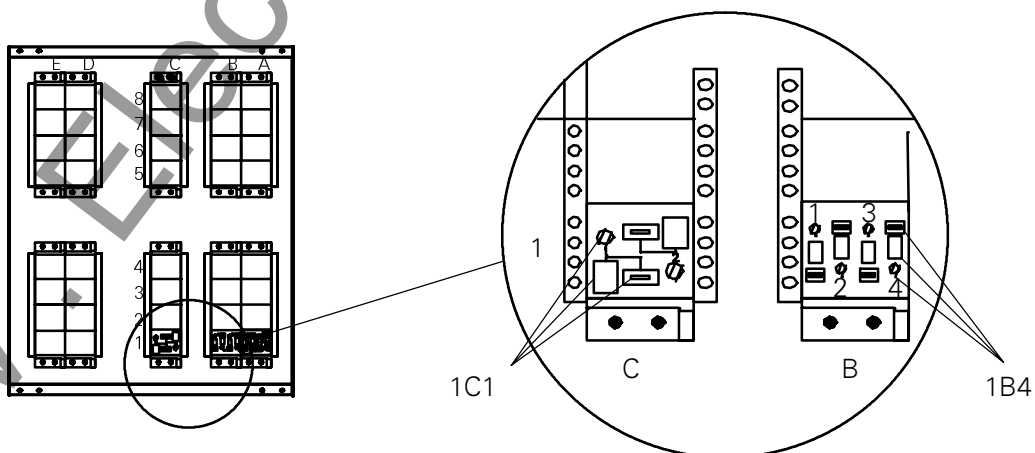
/4 Connecting Plugs on Installation Housing (Back View), Device Version 7SA519
